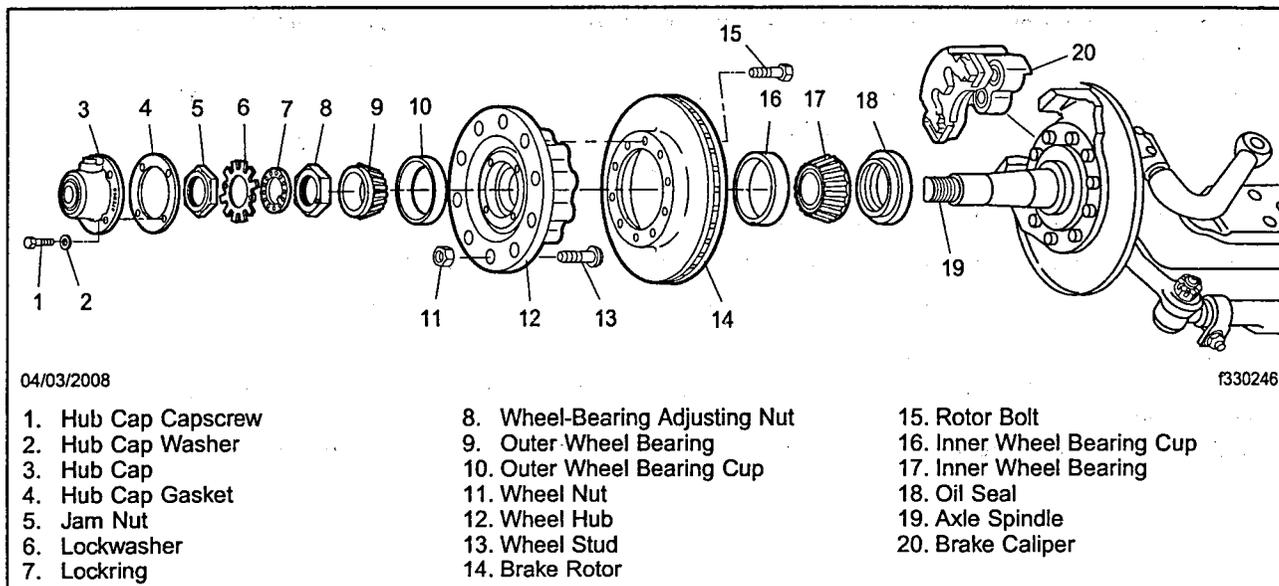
, Front Axle Assembly, Disc Brakes (New Spindle Nut Set Shown)
